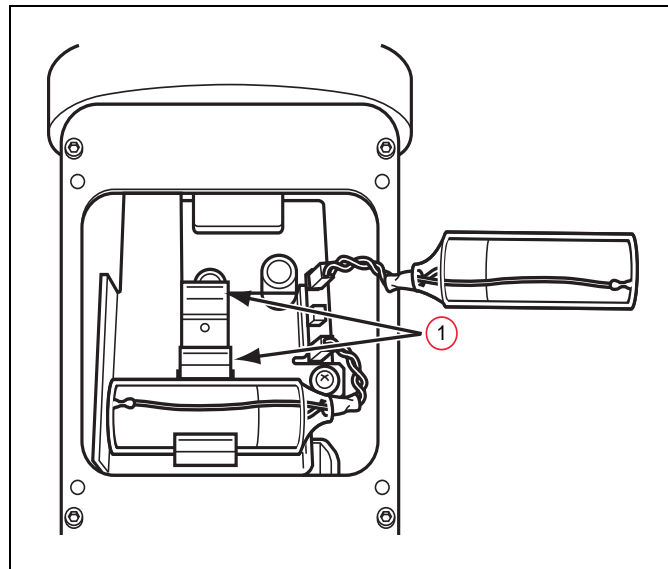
Top Old Backup Battery Removed from (1) Holder
